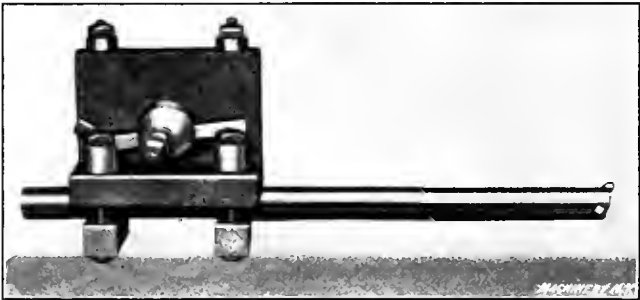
Boring Tool used for Boring Taper Holes such as Tapers for Rope Knot in "Woodpecker" Sockets
